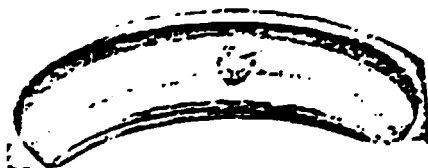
Peeling off point in the outer ring race of the grooved ball bearing 6309 acc. to Fig. 26.
